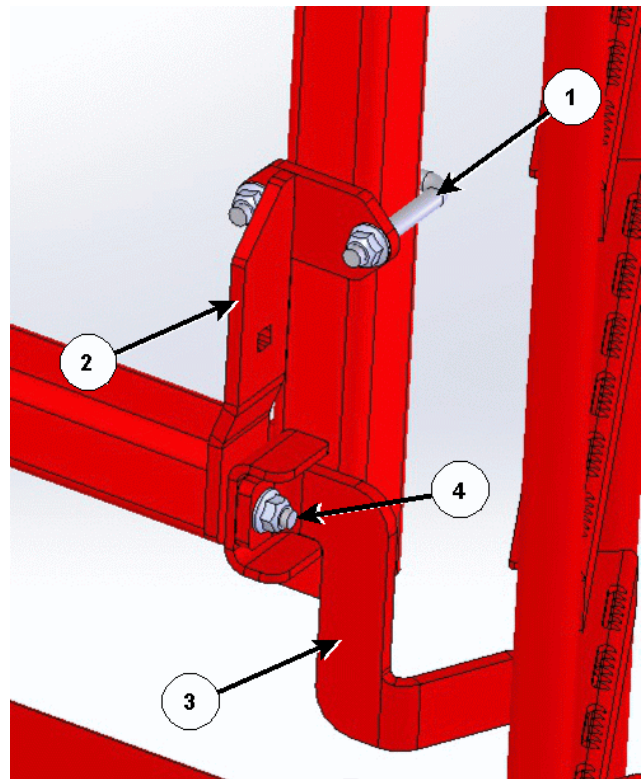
Fasten the mounting bracket to the platform upright and ladder support bracket
